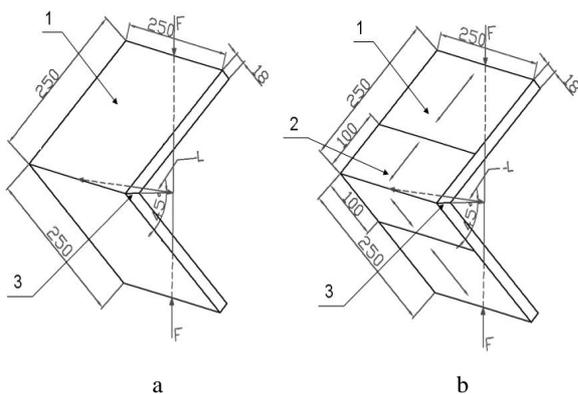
Specimen scheme of uncoated (a) and veneered (b) mitre joints: 1 – panel (particleboard); 2 – wood veneer; 3 – glue line (PVA); F – load direction
